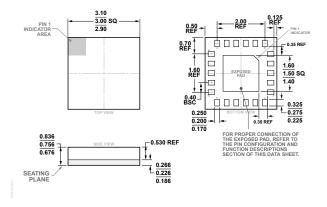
22-Terminal Land Grid Array [LGA] (CC-22-5) Dimensions shown in millimeters
